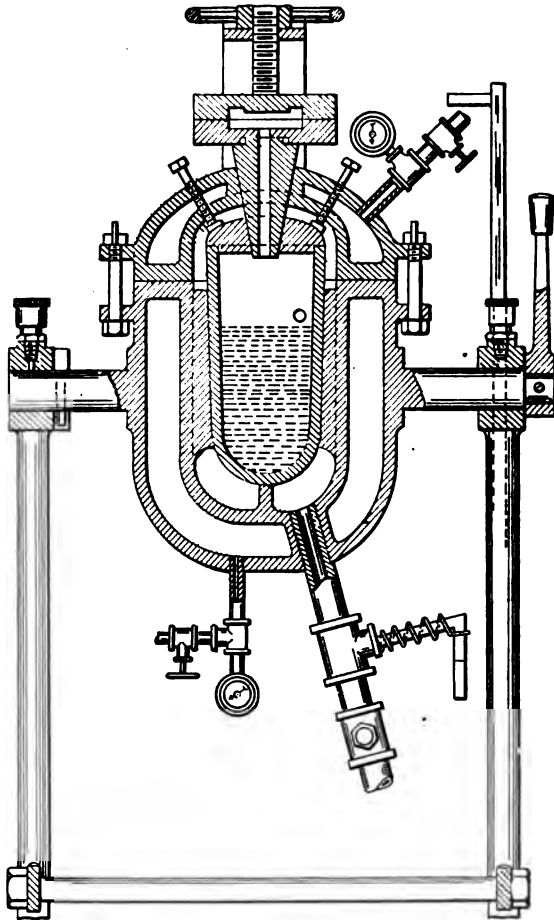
CHANDLER DIE-CASTING MACHINE.
